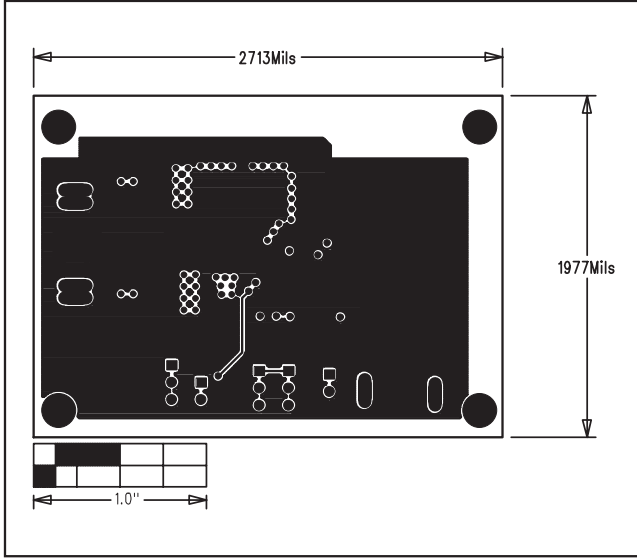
MAX8646 EV Kit PCB Layout—Layer 3
